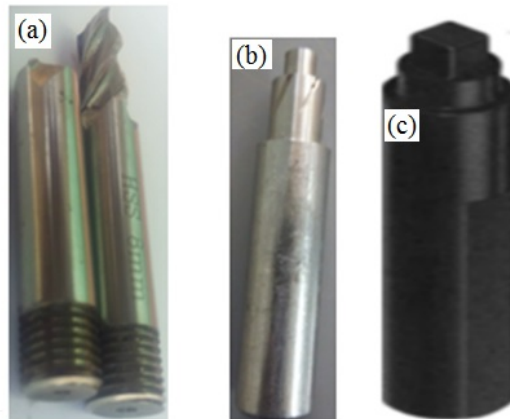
(a) End Mills for Preparation of FSW Tools; and Fabricated FSW Tools From (b) High Speed Steel (End Mills), (c) Heat Resistance Alloy
